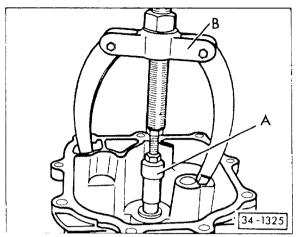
Main shaft needle bearing in gear carrier housing cover, removing
